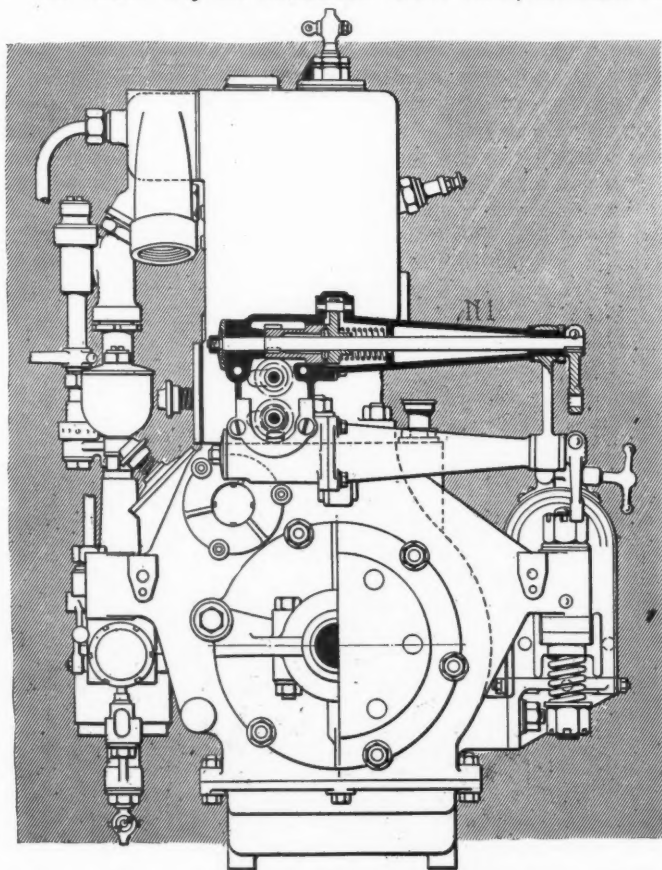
Rear elevation of Rockefeller sleeve valve motor, showing transverse control rods for regulating the abutments within the intake and exhaust sleeve
